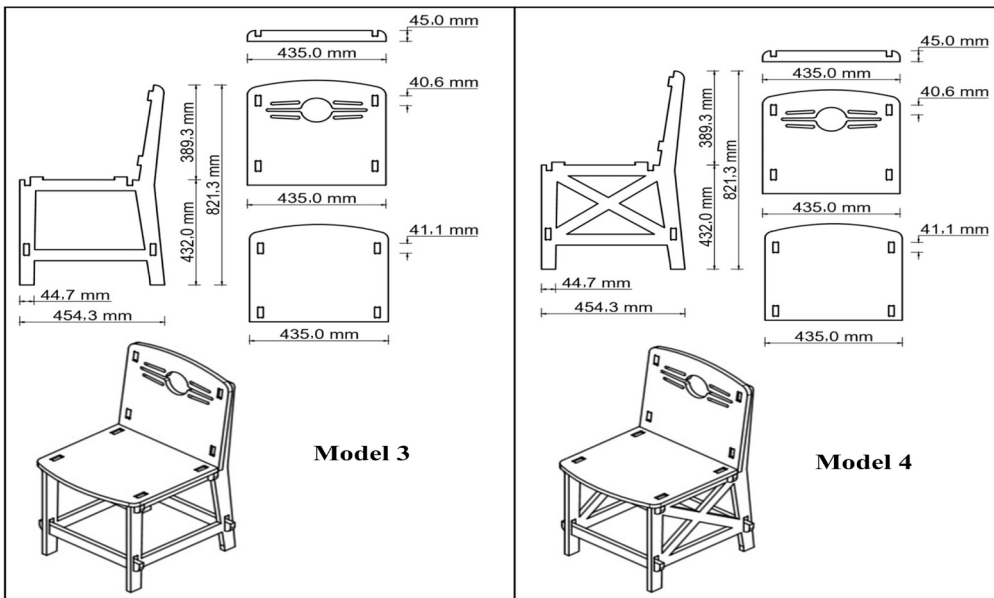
Technical drawings and dimensions of the (a) Chair Model 3 and (b) Model 4.
